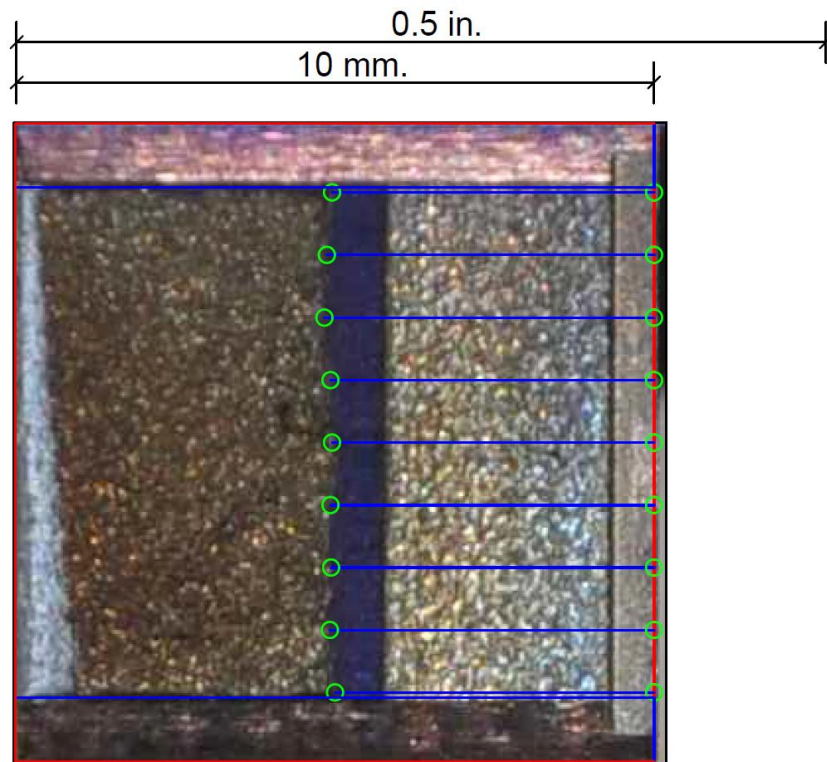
Specimen A15' Fracture Surface
